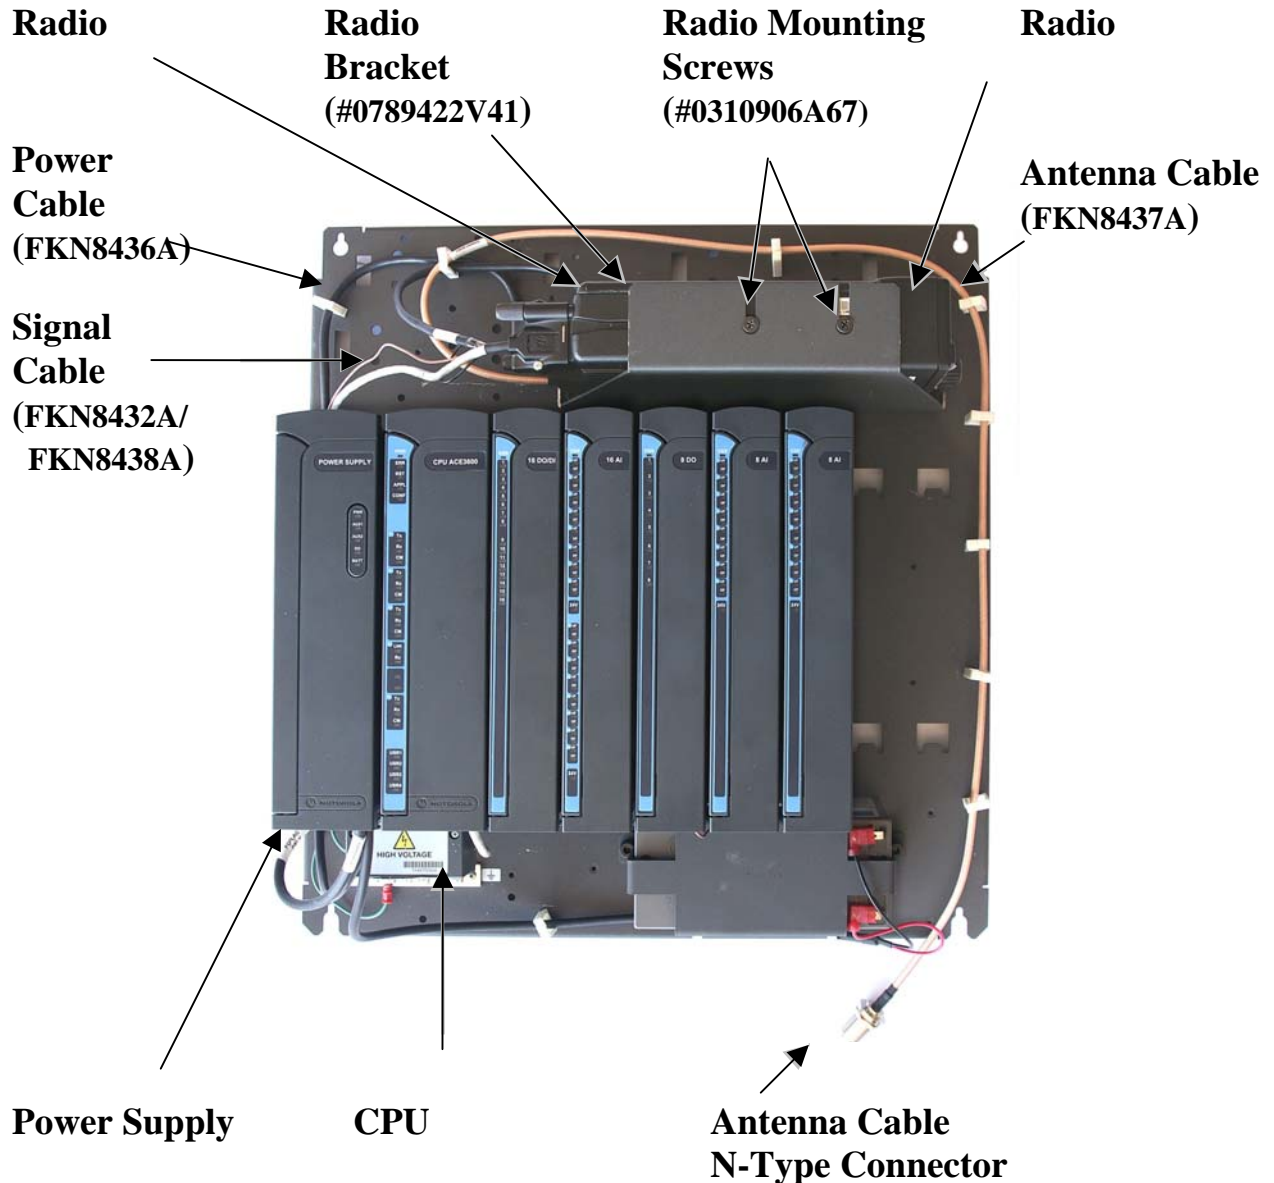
XTL5000/XTL2500 Radio Installed on ACE3600 Chassis
